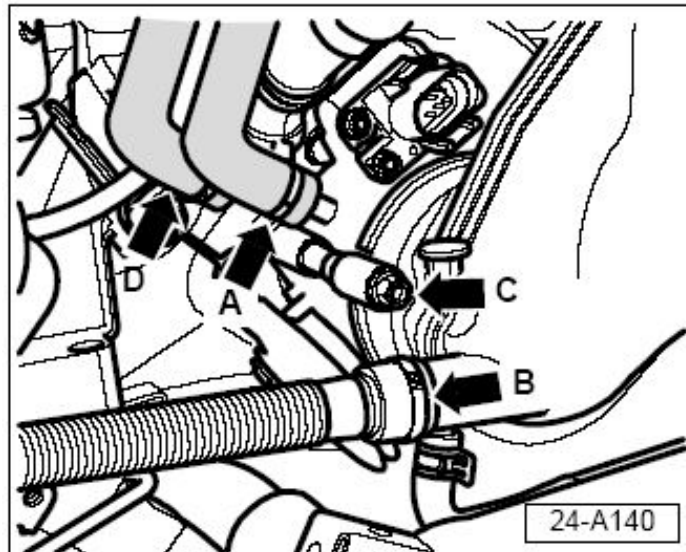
The canister purge regulator hose (A), the crankcase ventilation hose (B), the cap screw (C) and the vacuum hose (D).
